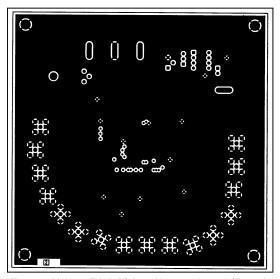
MAX555 EV Kit PC Board Layout—Layer 2 (Ground Layer)
